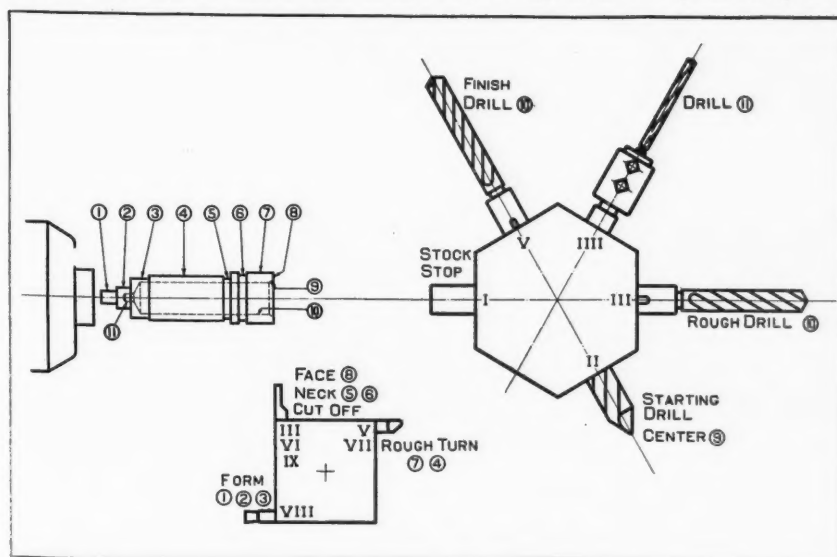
Tooling Lay-out for Machining Suction and Discharge Valve in Lots of Ten on a Turret Lathe
